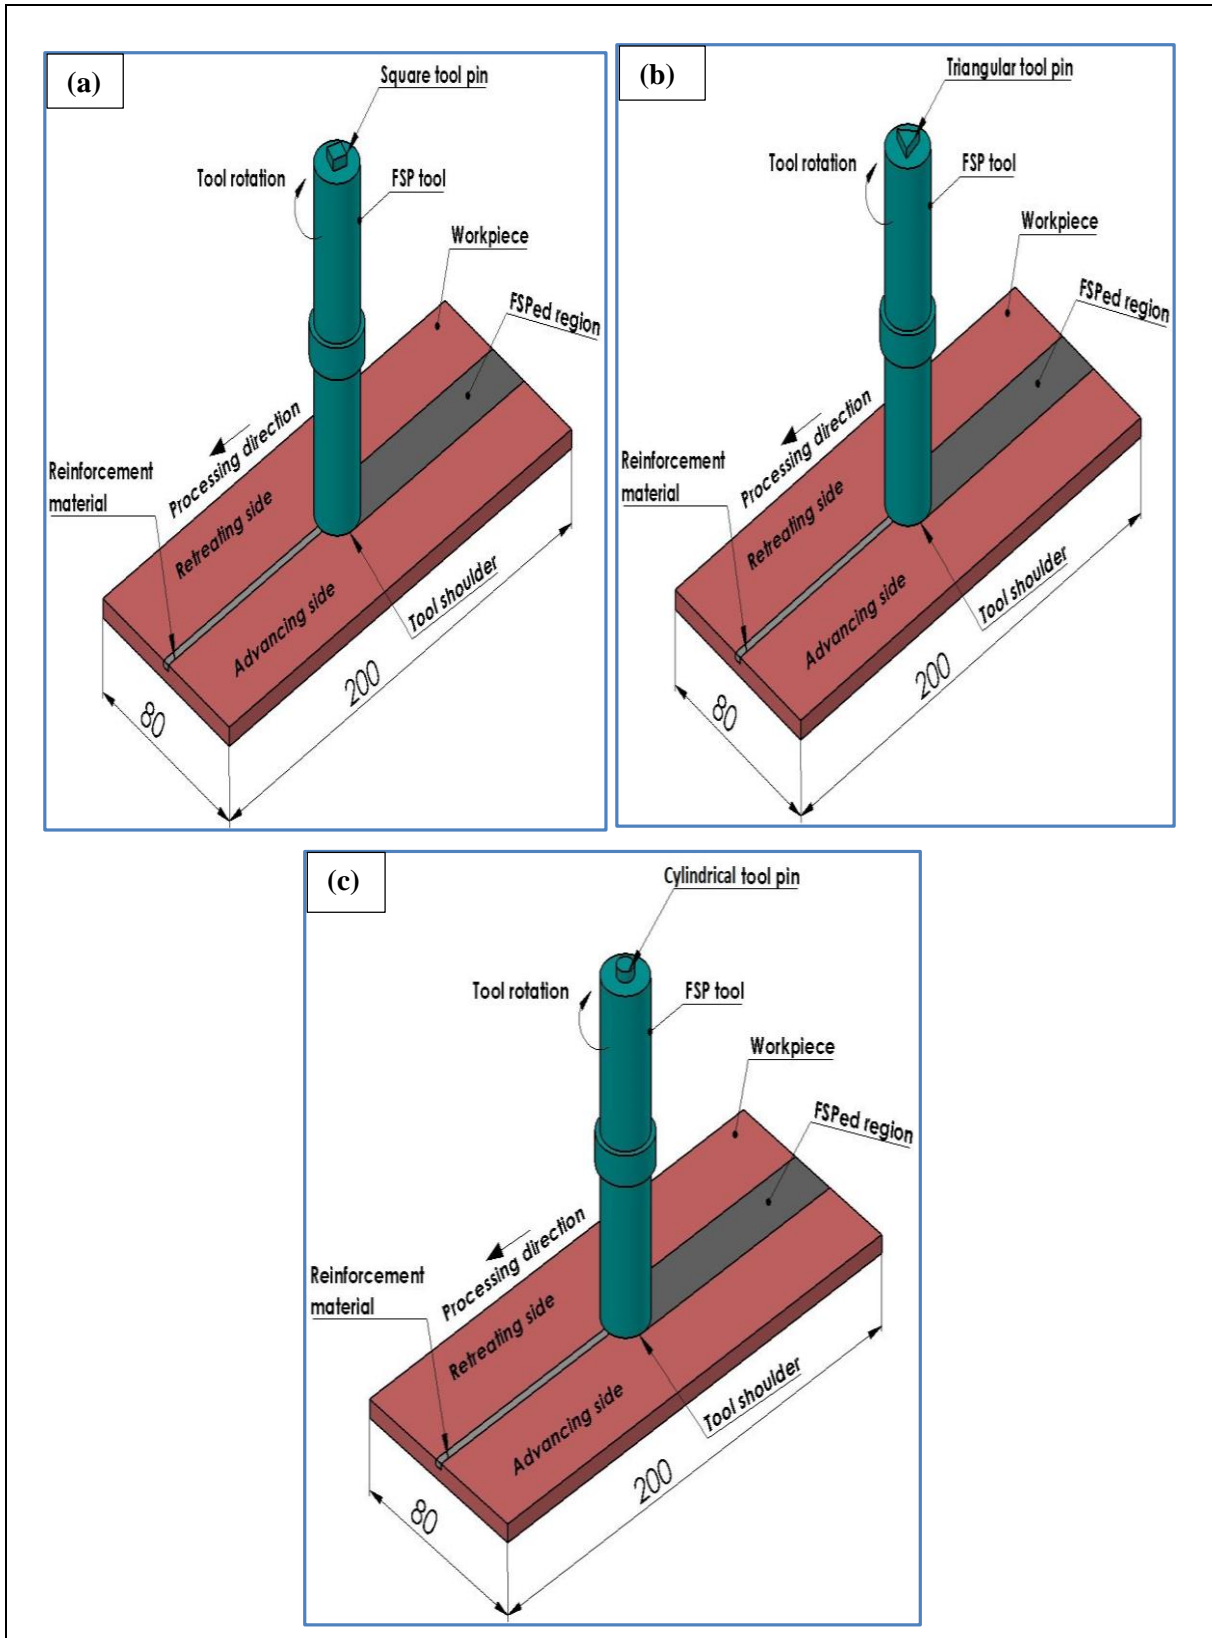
Making Grooves and formation of SAM in the grooves followed by FSP procedure with different tool pins (a) Square tool pin profile (b) Triangular tool pin profile (c) Cylindrical tool pin profile
